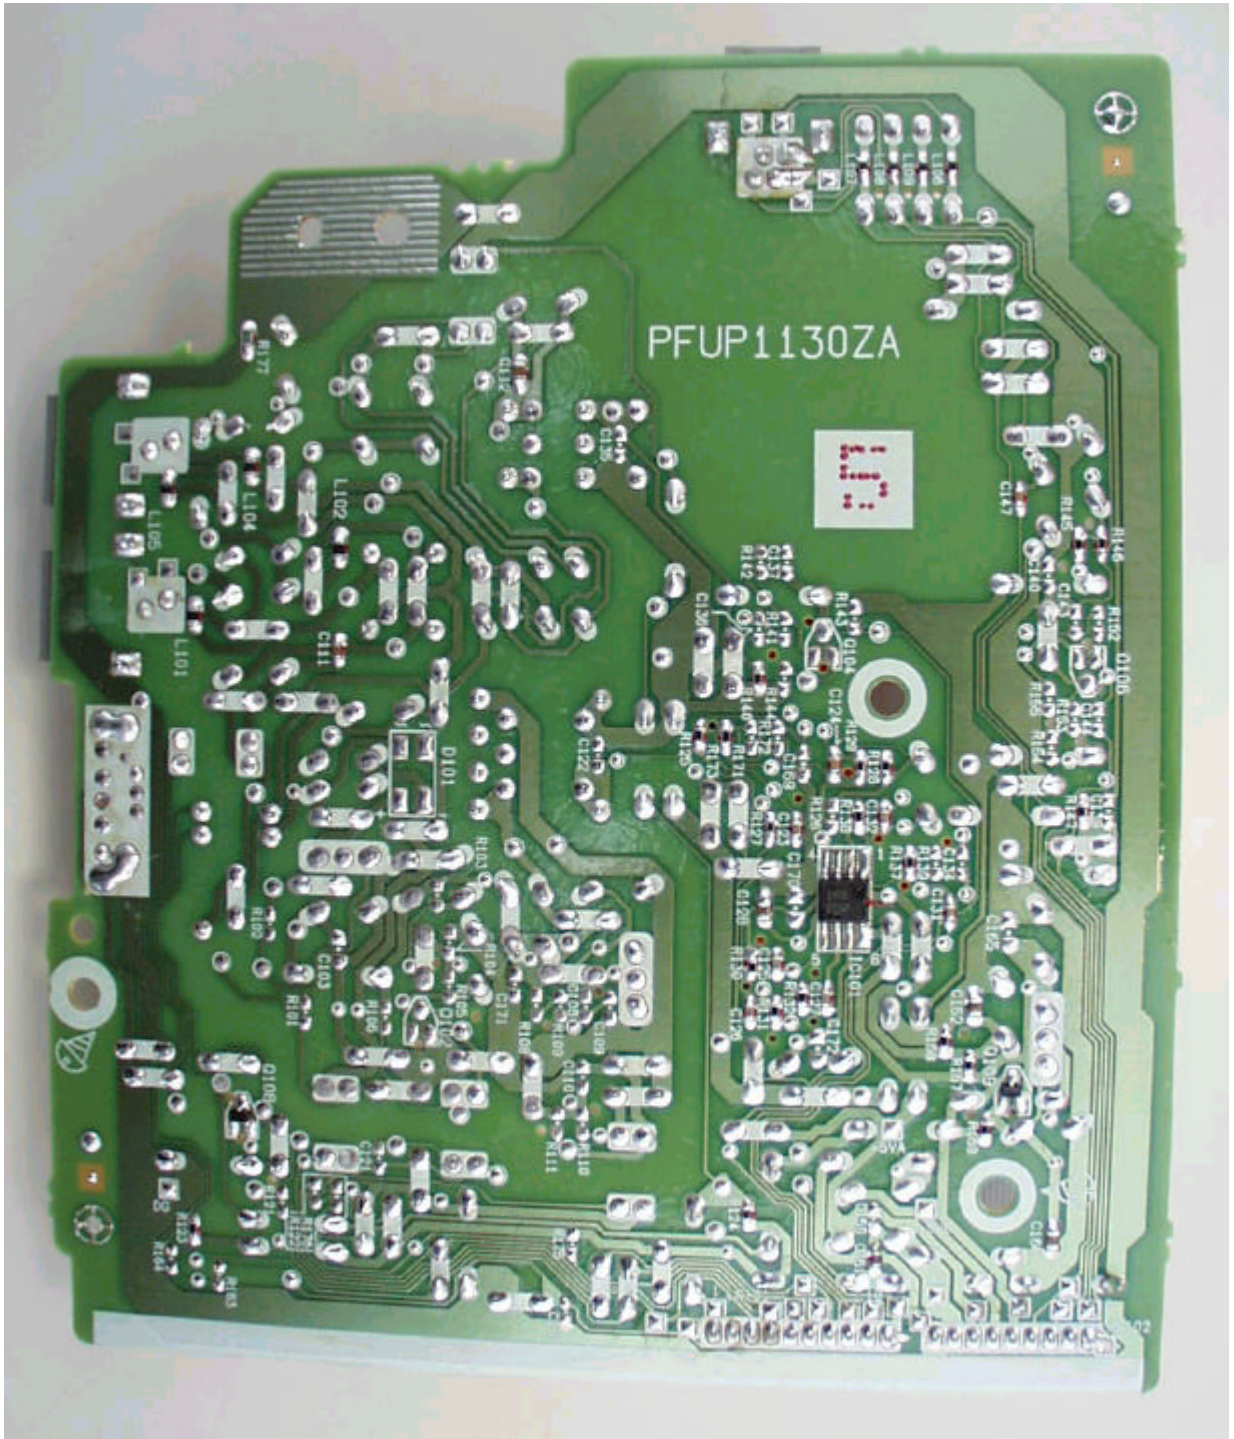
POWER SUPPLY BOARD SOLDERING SIDE
